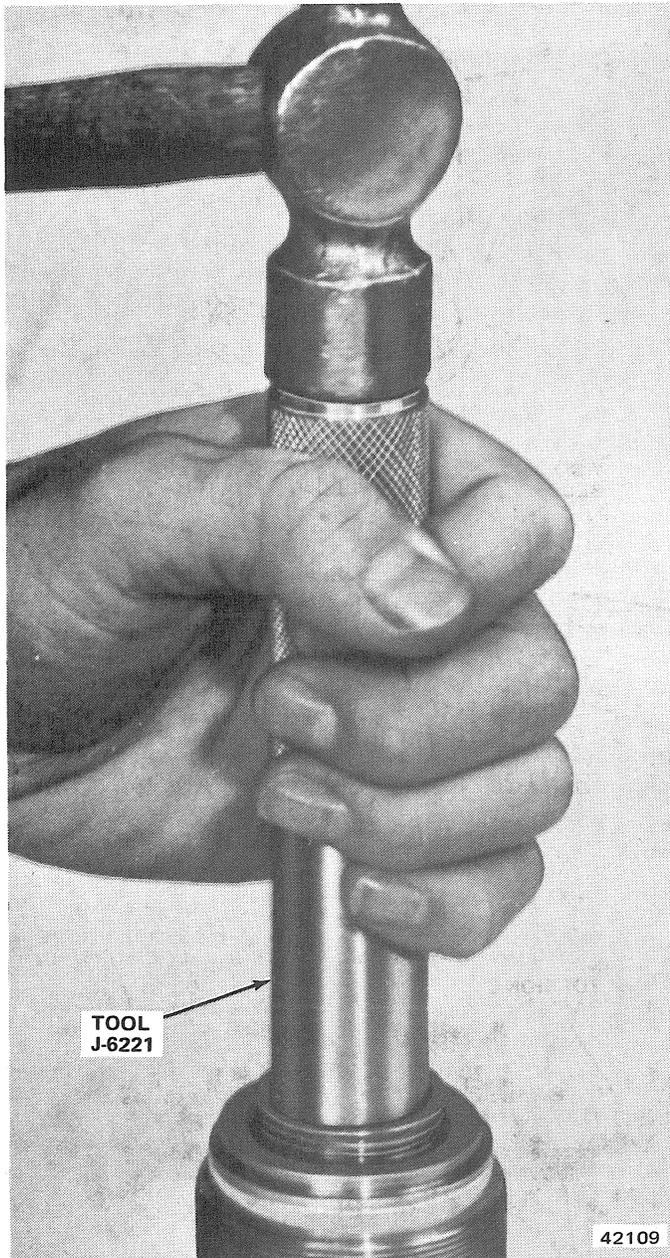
L-25 Adjuster Plug Needle Bearing Removal/Installation
